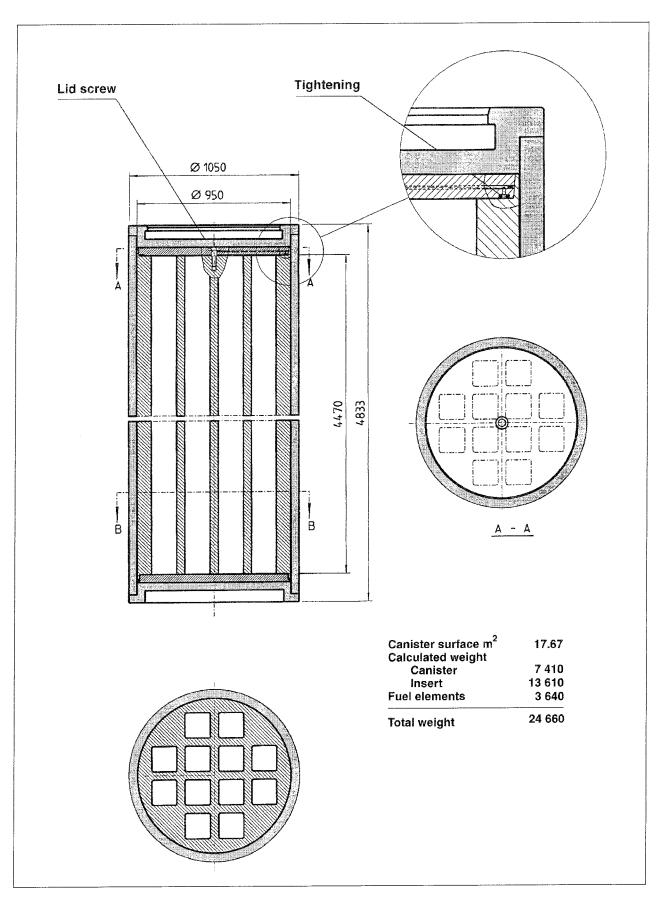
Drawing showing the design and principal dimensions of the reference canister, BWR version.
